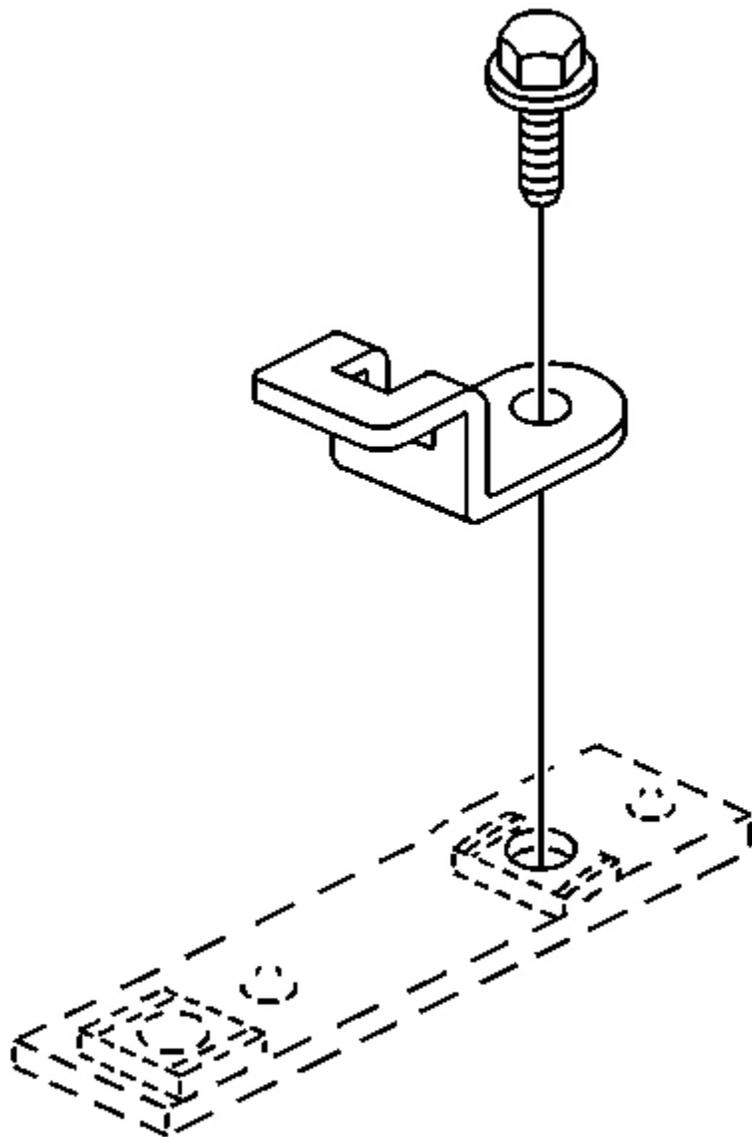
Child Restraint Tether Anchor Plate & Bolt
